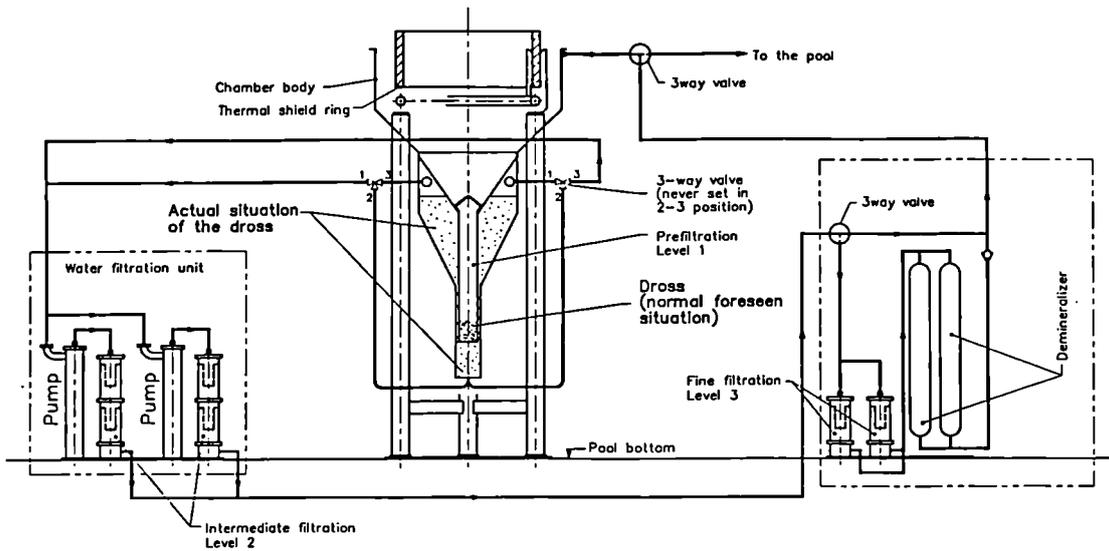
Flooded chamber for plasma cutting (lower part only)
